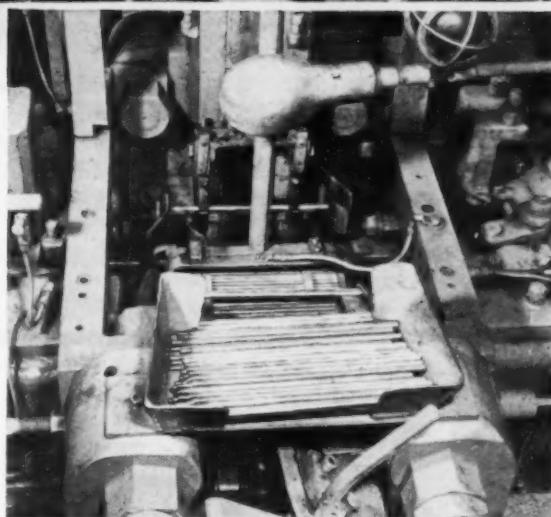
Close-up of the double-end heading station. Blanks feed from the hopper to a magazine where both ends are heated by induction coils. Fingers on the vertical slide in back of the magazine transfer heated blanks to the heading dies located below.
